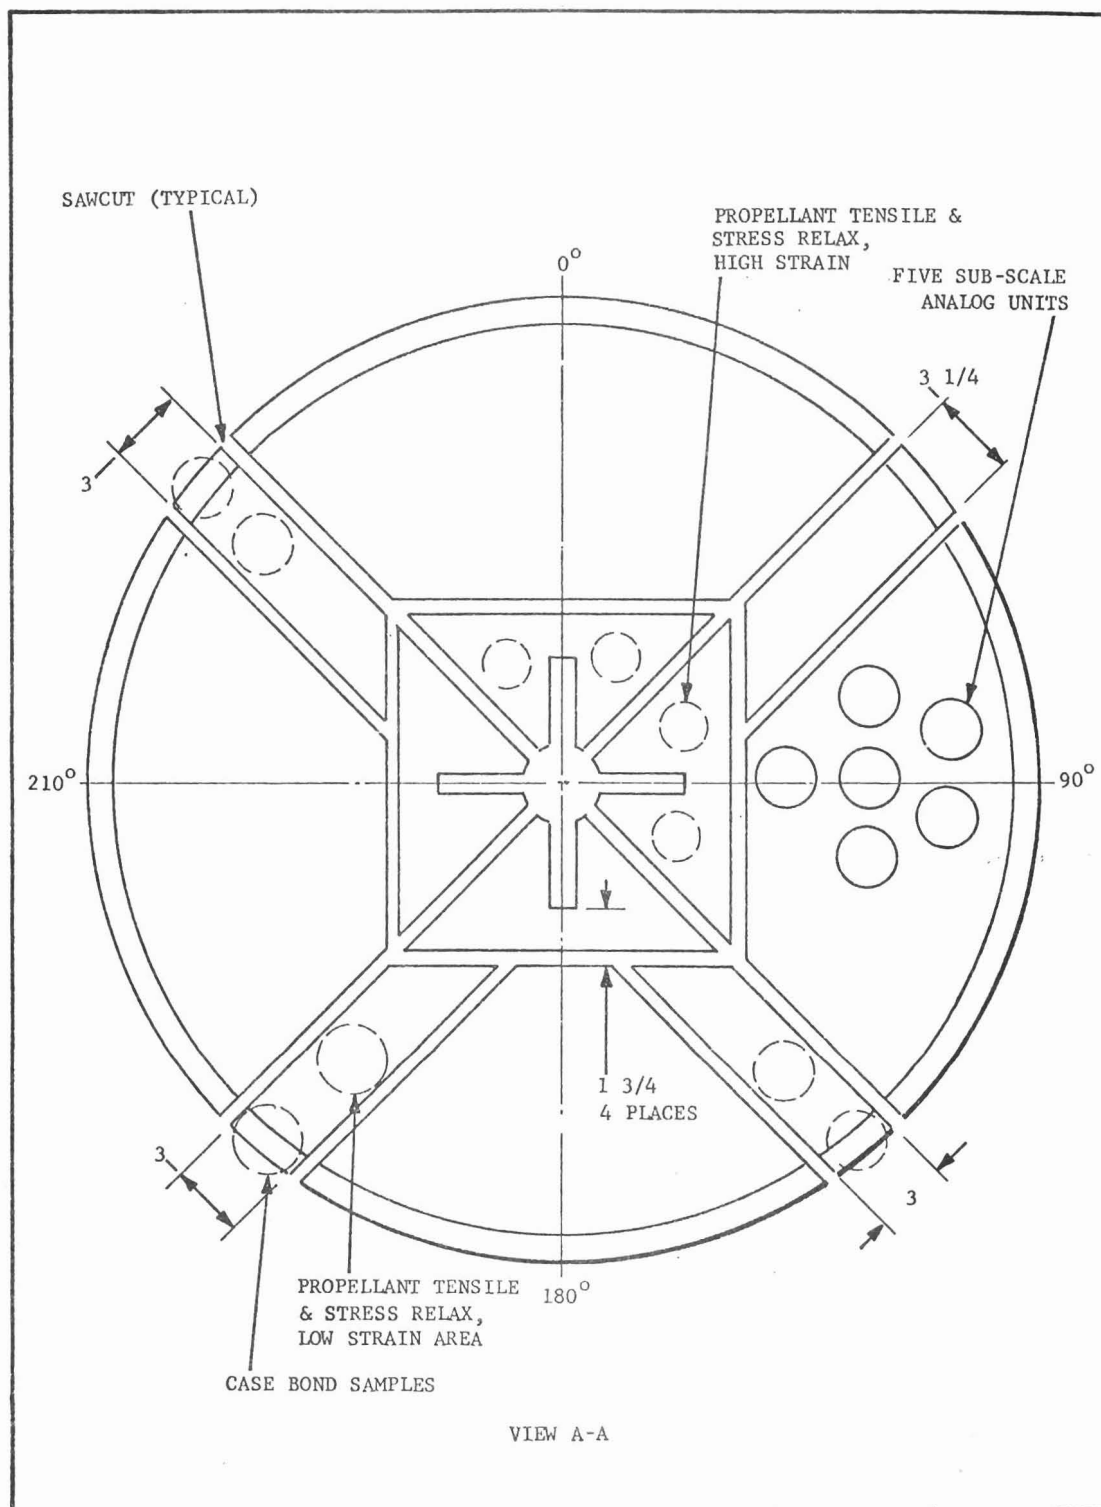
B. Minuteman Third Stage Sectioning Plan
